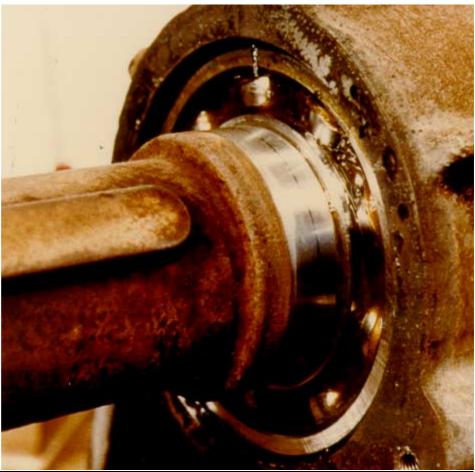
Geared motor after one year's operation in adverse conditions.
